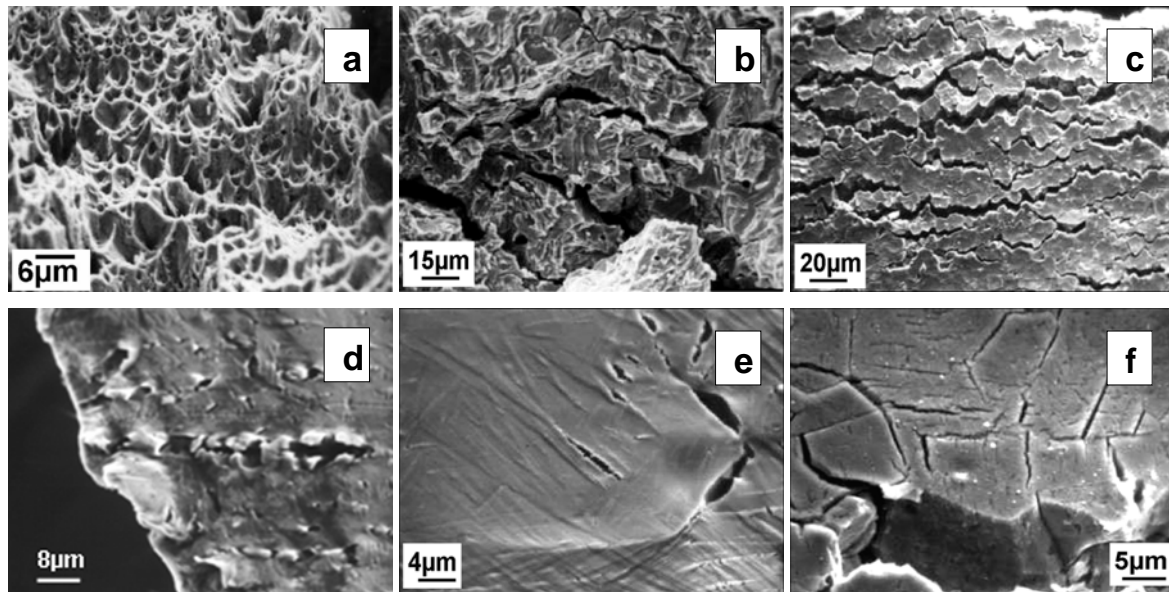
Ductile fracture surface in sample of 304L steel tensile tested in air (a). Tensile tested samples during H-charging (b-f). Brittle fracture surface of 304L steel (b). Large cracks on lateral surface of 304L steel (c). The initial stage of growth cracks at the H-induced microcracks in 430L (e) and in 304L (f)
